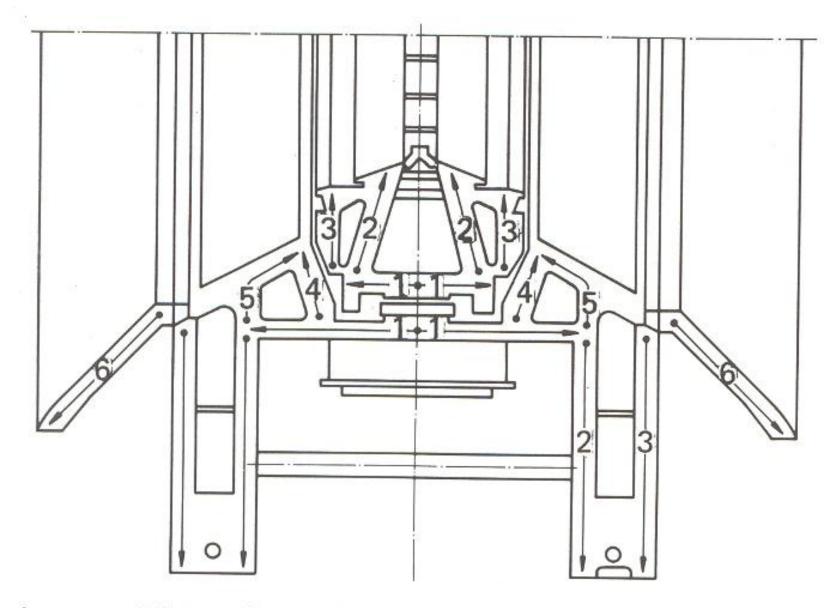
High-Pressure Pump Unit with Assembled Oil Return Pump
